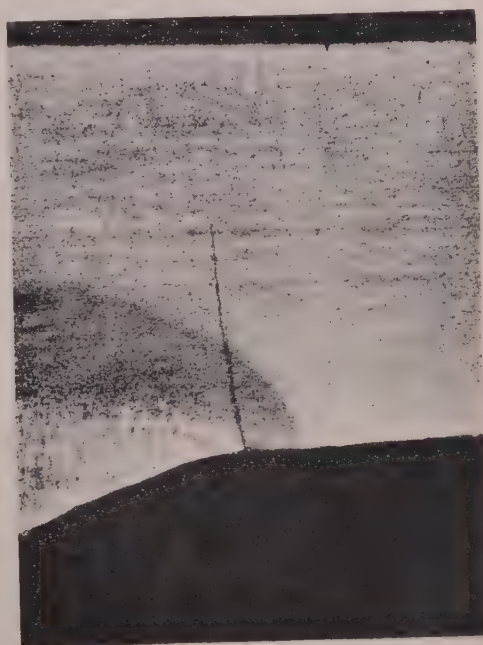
Fatigue failure at toe of machined, concave fillet weld. Note difference in metallurgical structure at point where crack starts
